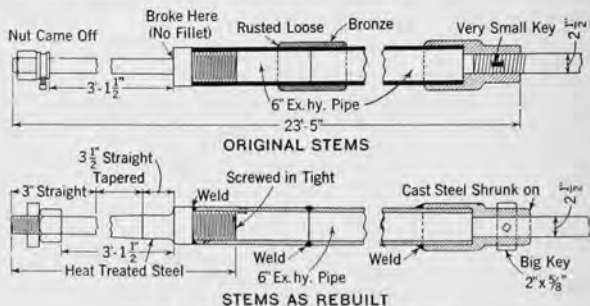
KEOKUK LOCK; VALVE STEM REPAIRS.
